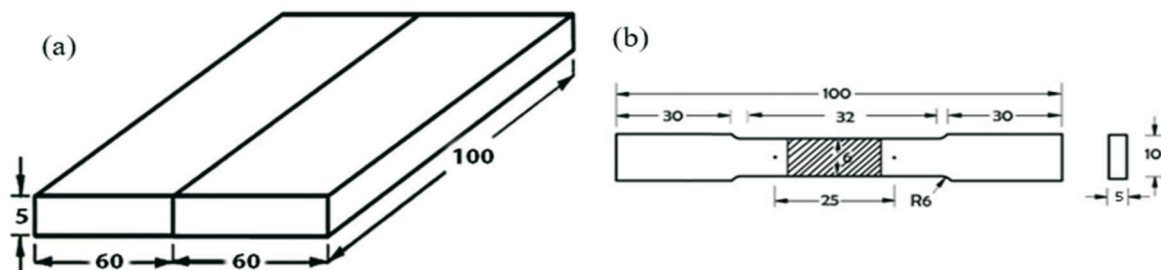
a) Schematic of the single butt configuration b) Configuration of a tensile specimen
